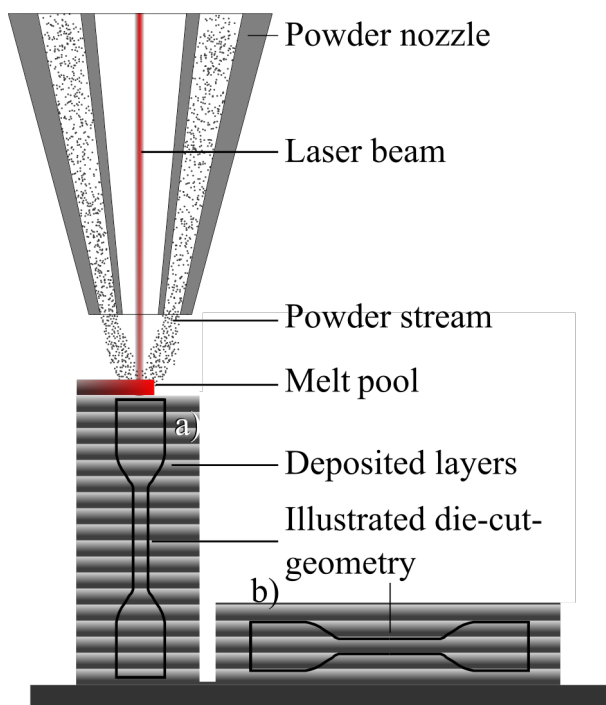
Schematic DED-LB process and the two building strategies for generating parts (a) DED-LB part with illustrated die-cut geometry tensile specimen with perpendicular layers; (b) DED-LB sample with illustrated die-cut geometry tensile specimen with parallel layers.
